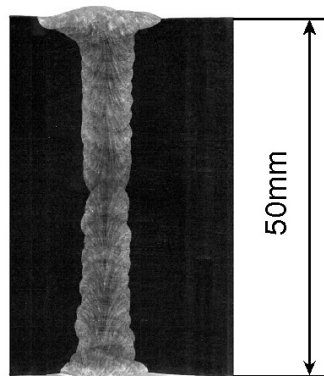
Macrostructure of 316FR welded joint.
